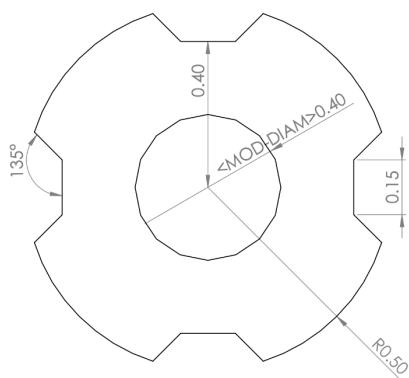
Nominal dimensions of the quartz capillary used for fabrication.
